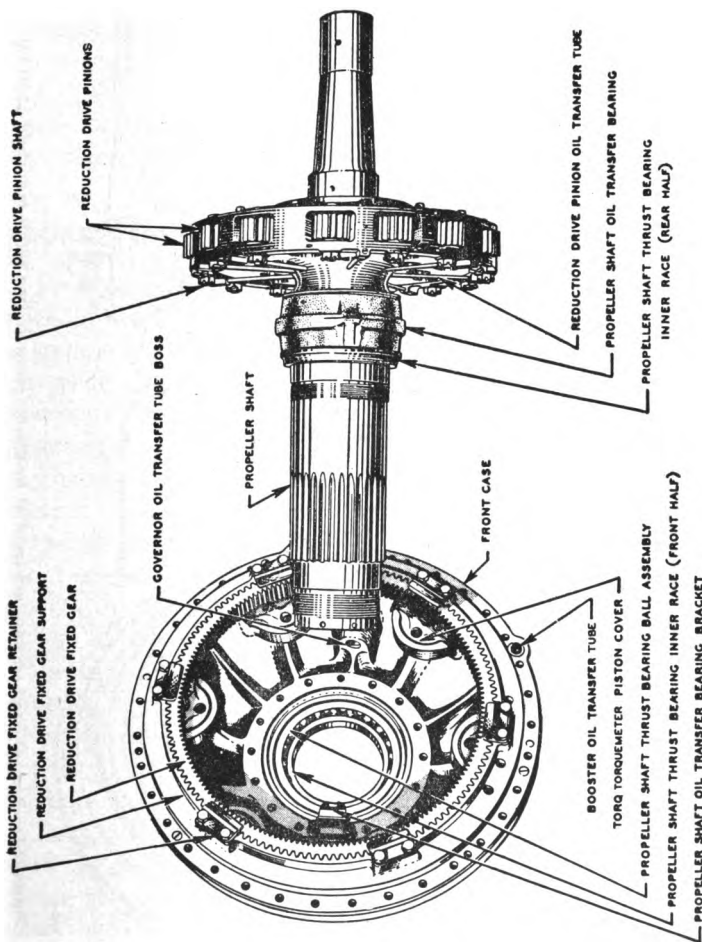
Front case and reduction gear assembly (20:1 reduction gearing).
